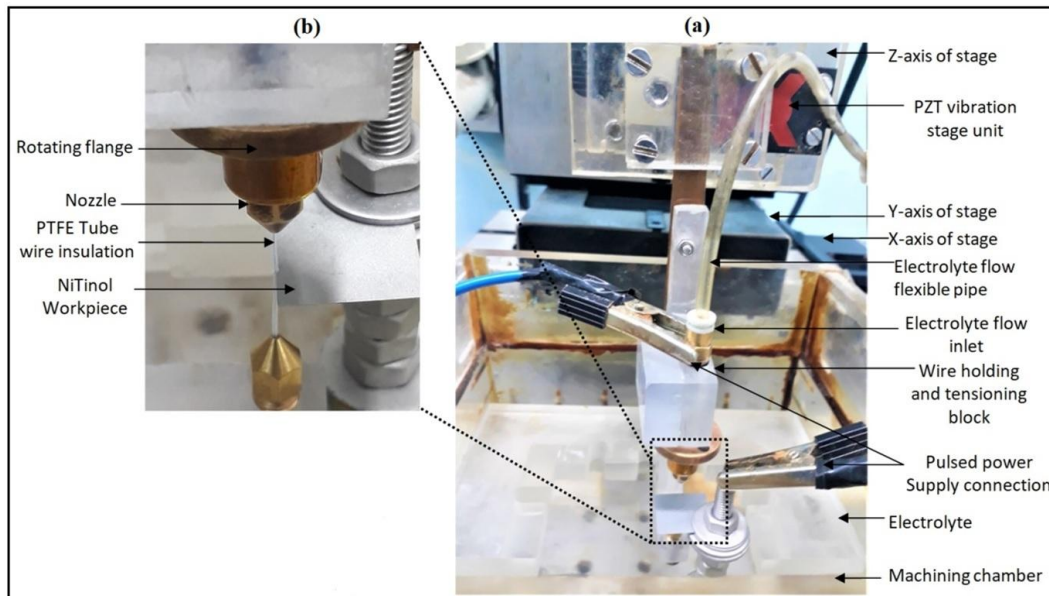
Actual WECM machining process with PTFE pipe tube insulation
